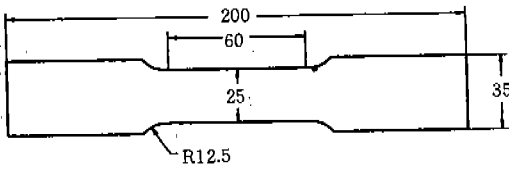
The Dimension of Tensile Specimen(unit : mm)
